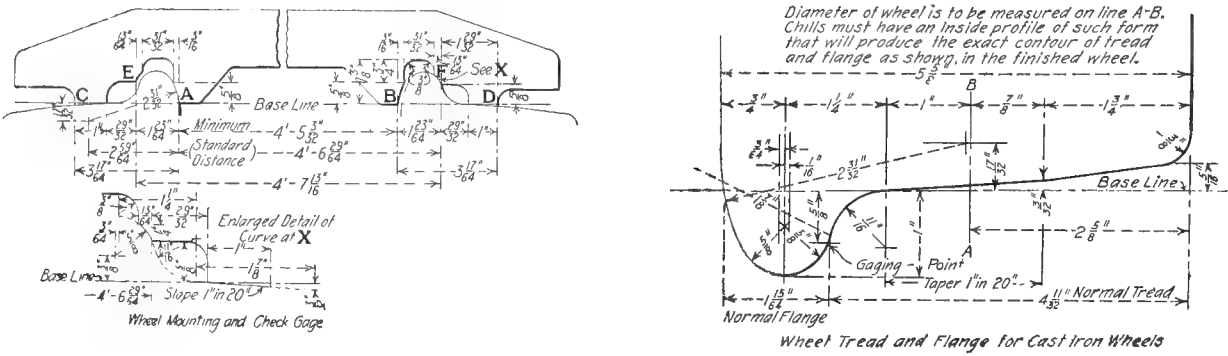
Standard Wheel Gages. (M. C. B. Sheet 16.)
